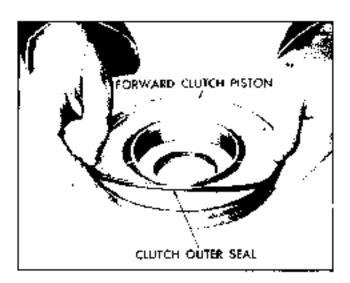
Removing Forward Clutch Piston Outer Seal
